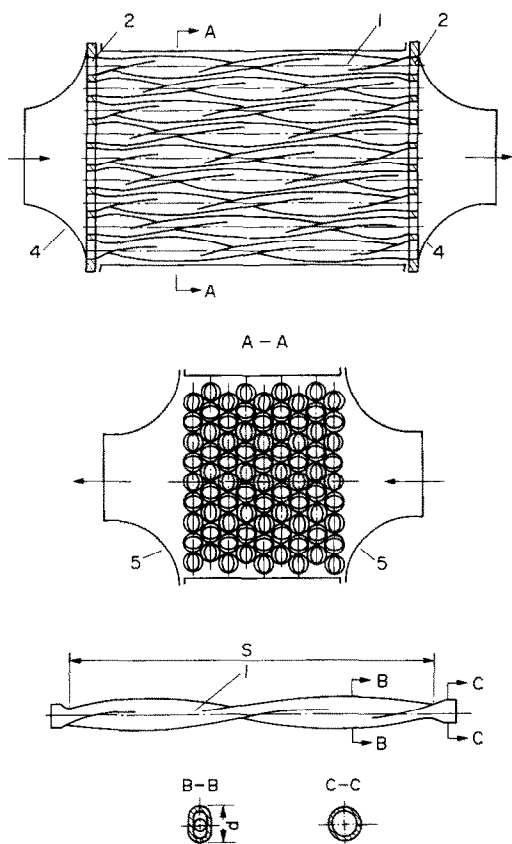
Schematic diagram of a heat exchanger with a cross flow past a bundle of helical tubes: 1, tube; 2, tube sheets; 3, shell; 4, 5 collectors for supply and discharge of heat exchanging media.
